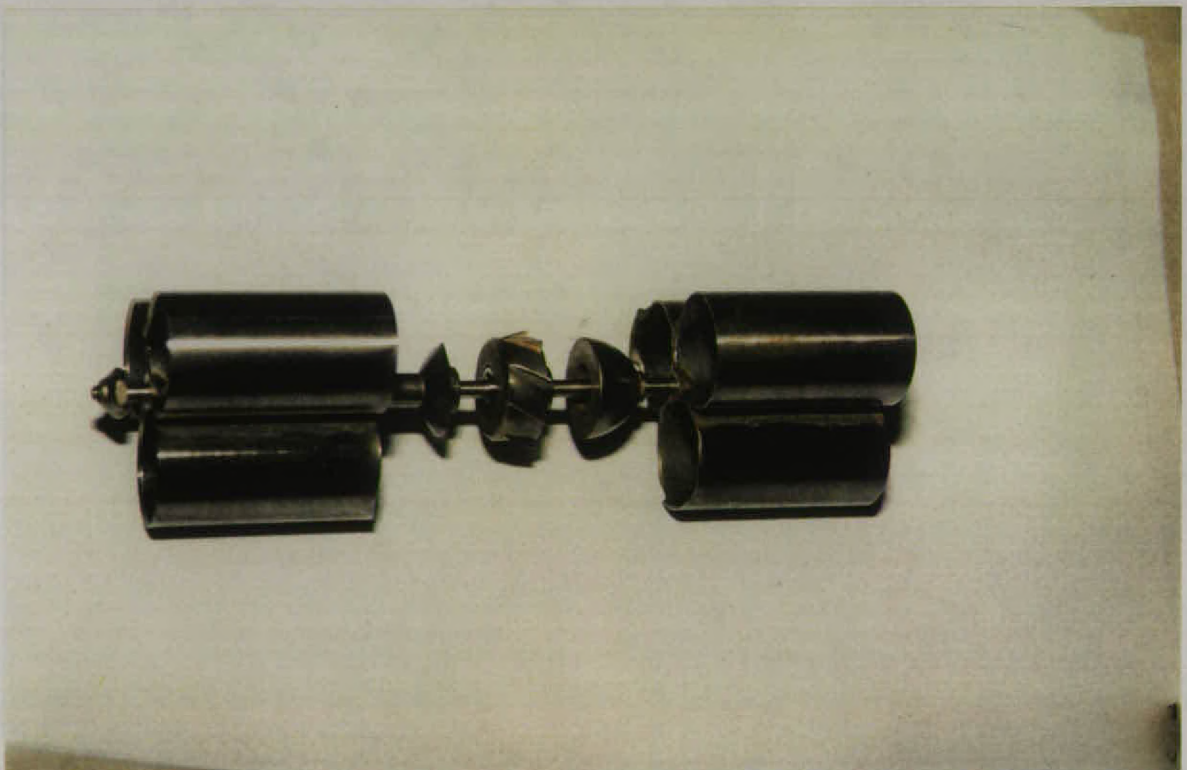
MANUFACTURER C. 50 mm DIAMETER METER, ROTOR SHAFT WEAR
